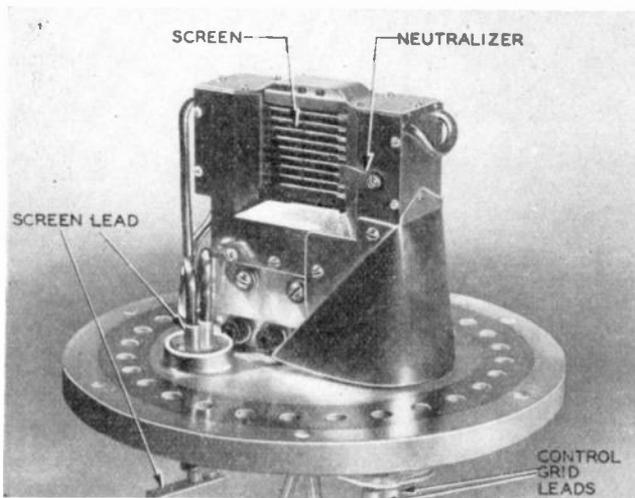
A completed header assembly showing No. 2 grids and neutralizers mounted.
